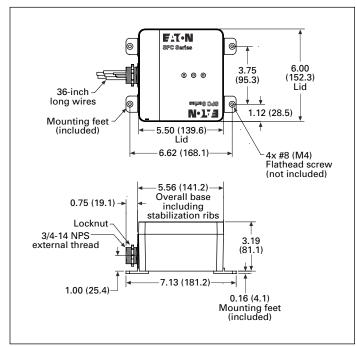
P2 Enclosure, NEMA 4X with Mounting Feet Dimensions, Weight = 4 lb
